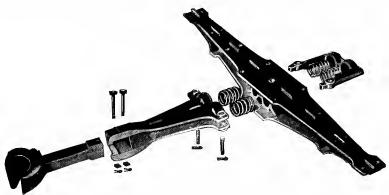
Parts of Commonwealth Cast Steel Transom Draft Gear for Wooden Cars. Commonwealth Steel Company.
